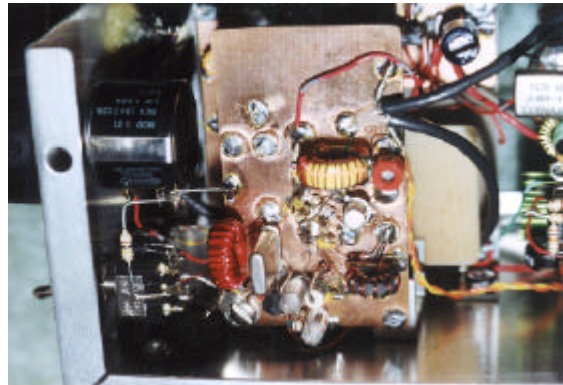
VXO/Doubler board. Varactors are soldered on top and bottom of DPDT switch.
